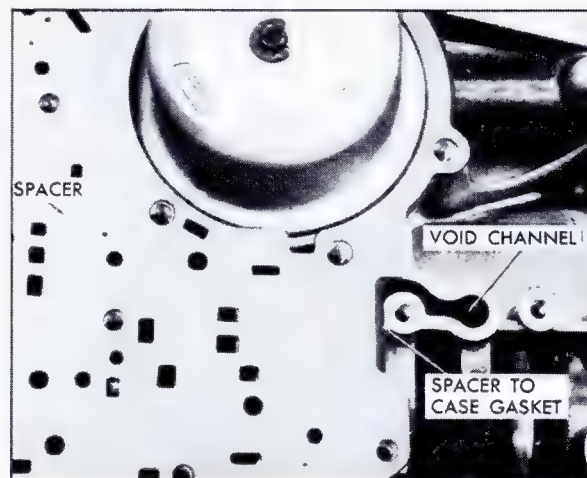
Valve Body Spacer to Case Gasket Identification
